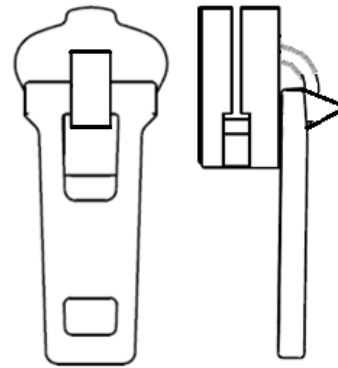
(F) AUTO LOCK REVERSIBLE PULLER
